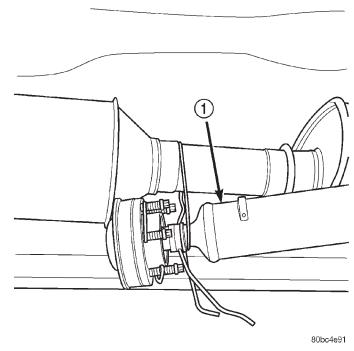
Rear Driveshaft - Supported 1 – REAR DRIVESHAFT
